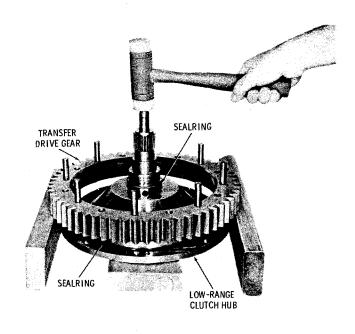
Removing low-range clutch hub from transfer drive gear
